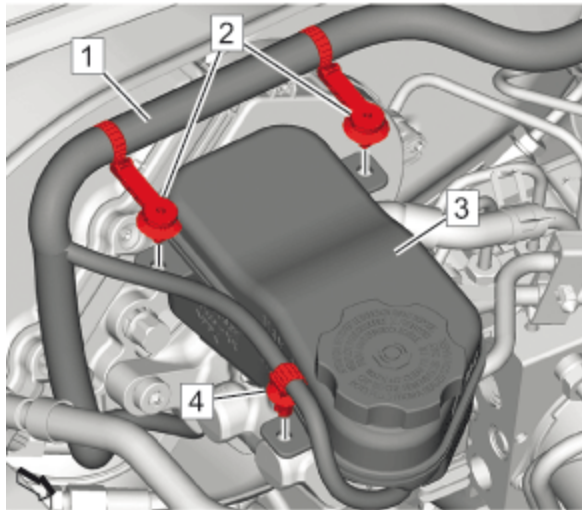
Brake Master Cylinder Reservoir And Body Wiring Harnes
